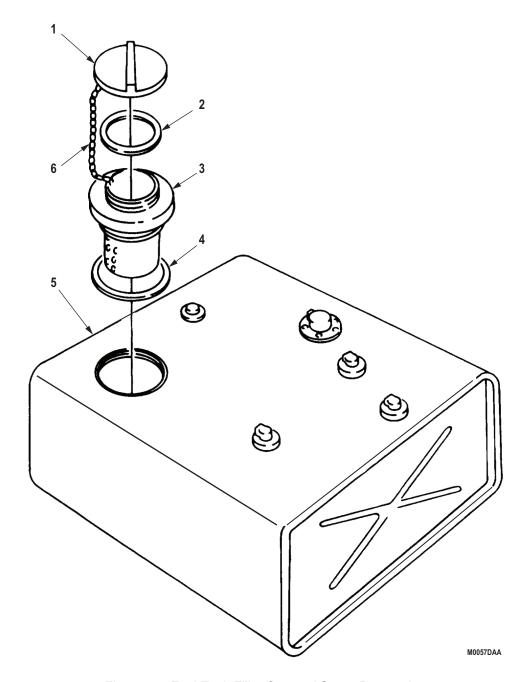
Fuel Tank Filler Cap and Spout Removal.
